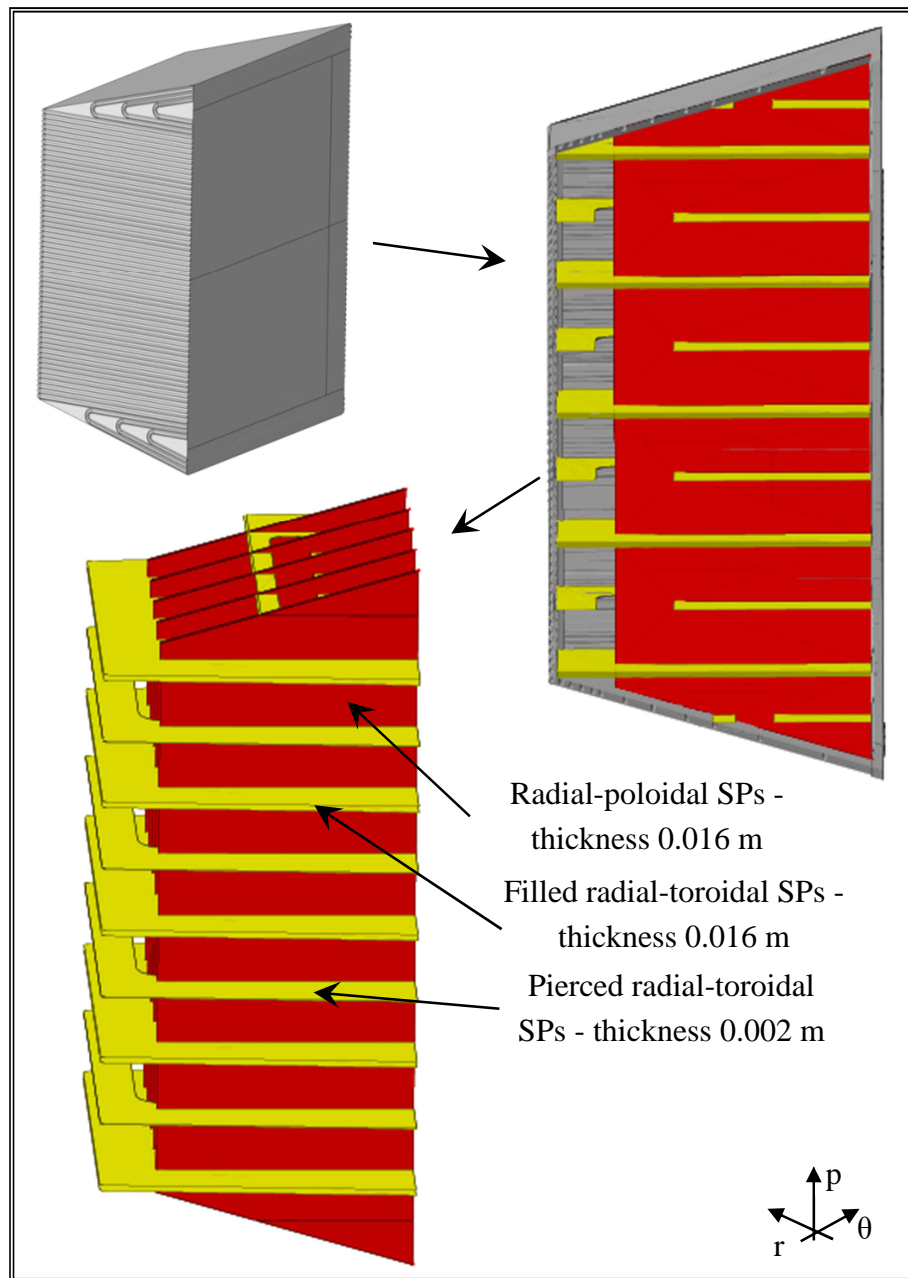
Configuration 3 - 3D geometric model exploded view.
